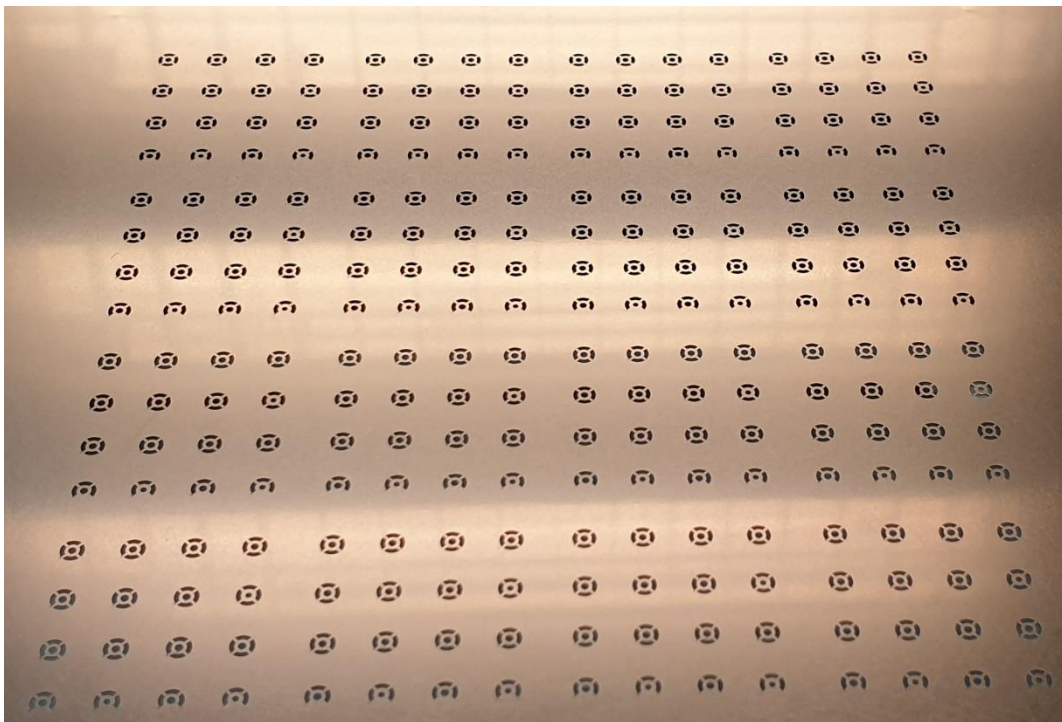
Metallic soldering stencil (used to solder antenna modules to motherboard).
